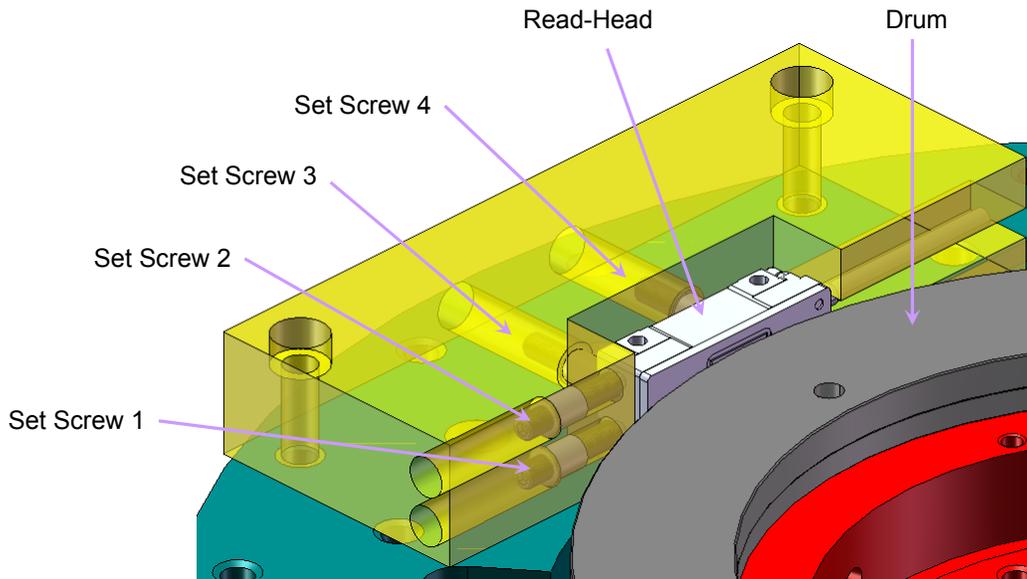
Tangential adjustment of the read-head for the ERA4282C encoder – rigid removable fixture method
